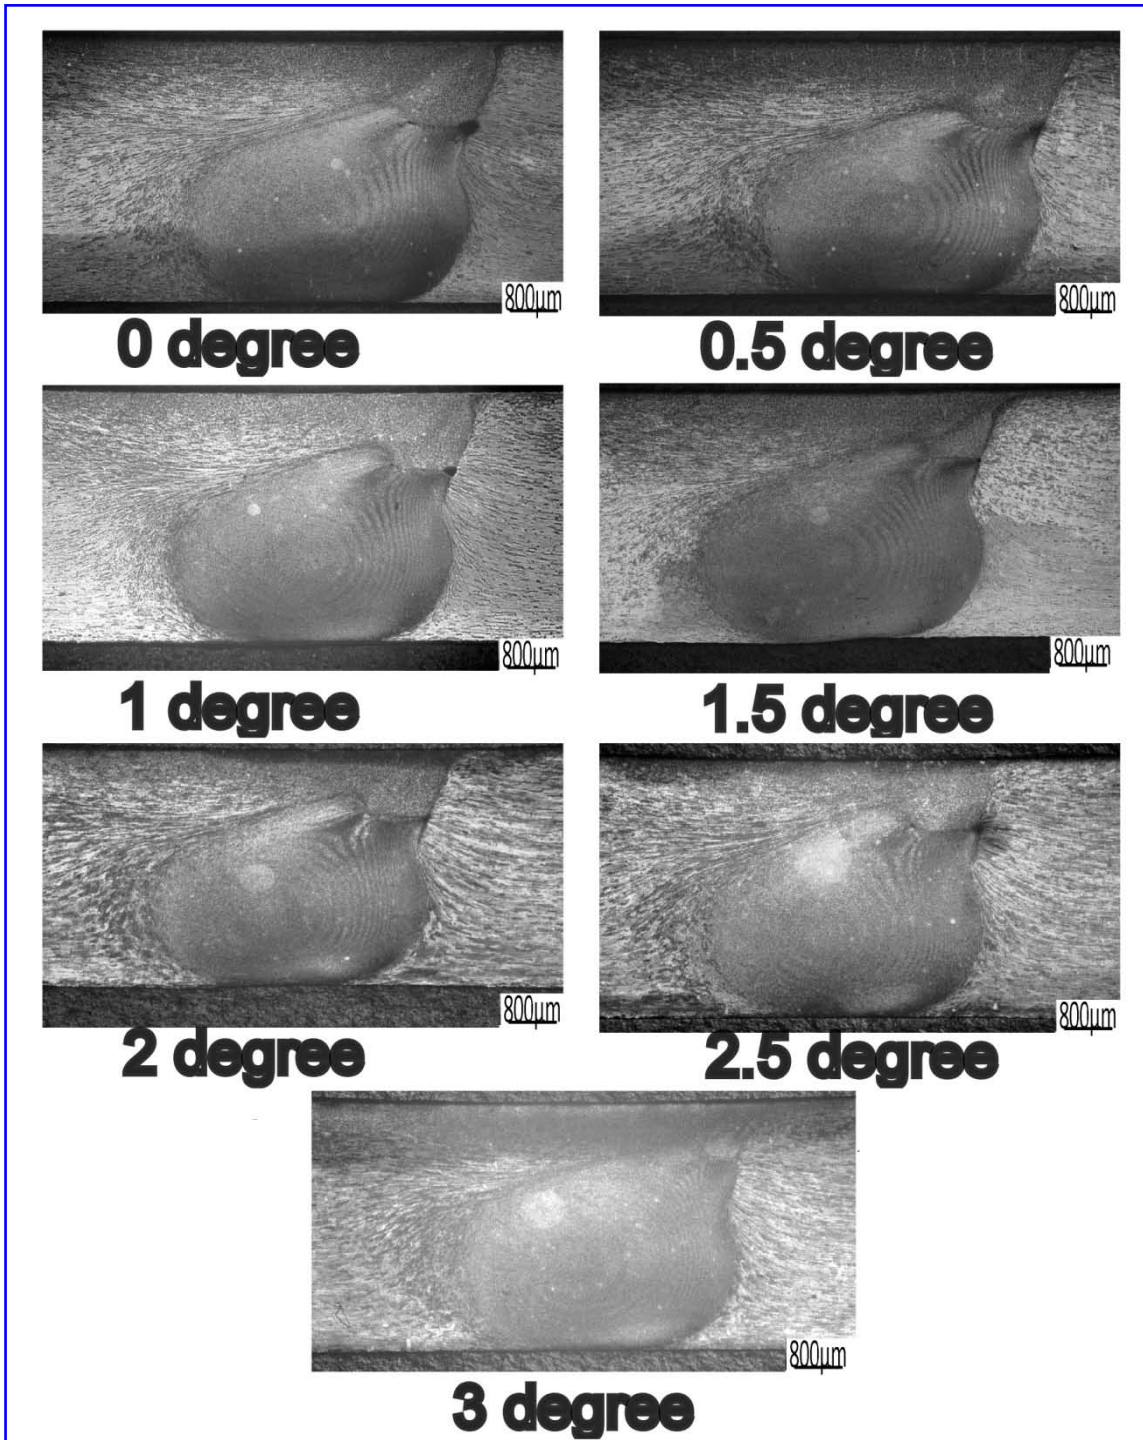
Microstructure of the friction stir welds elements at different tool tilt angle
